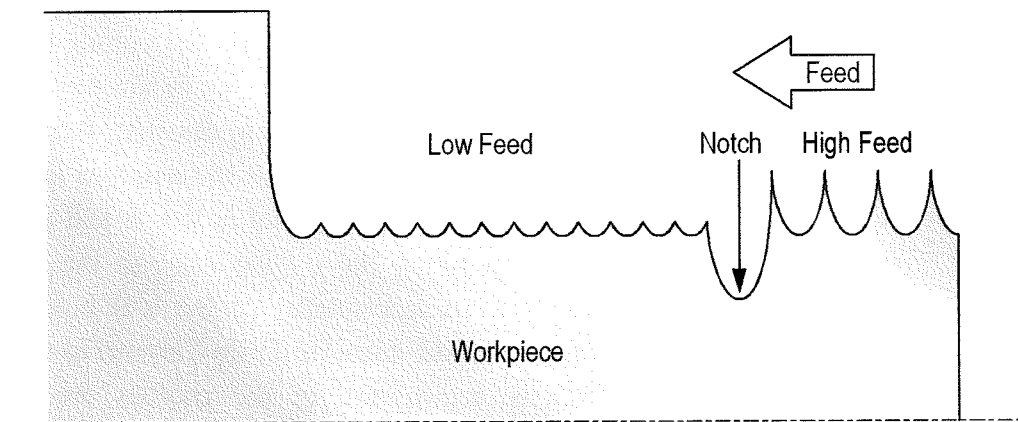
Sample work piece for recording the tool profile prior to low-feed machining
